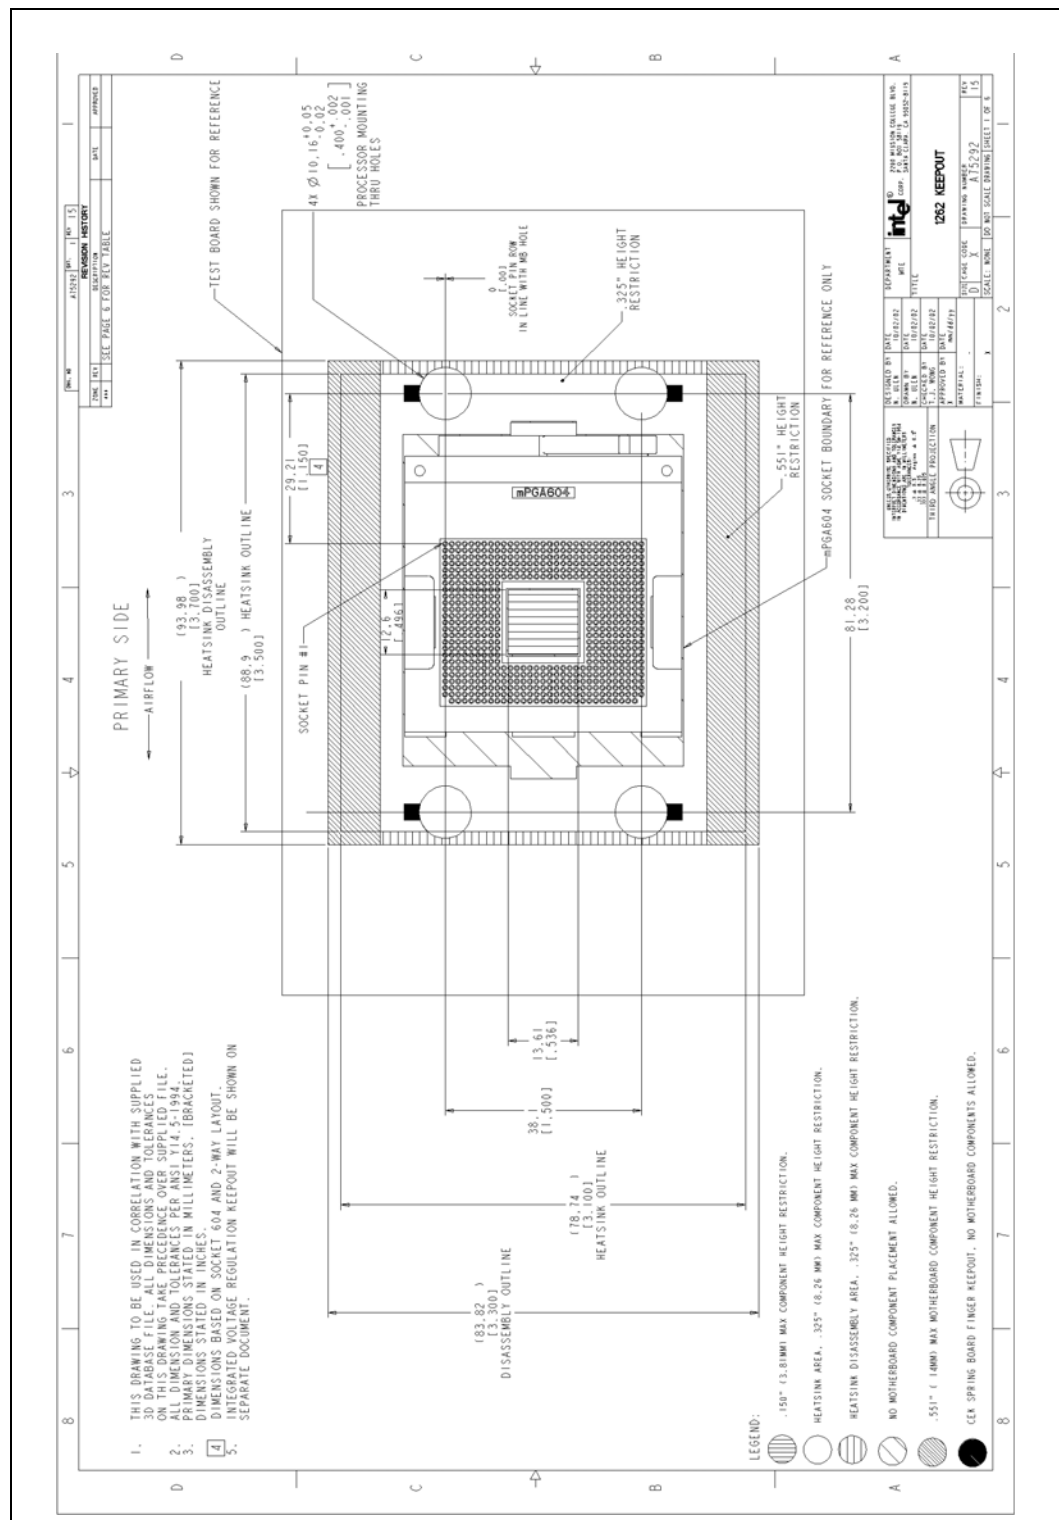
Top Side Board Keep-Out Zones (Part 2)
